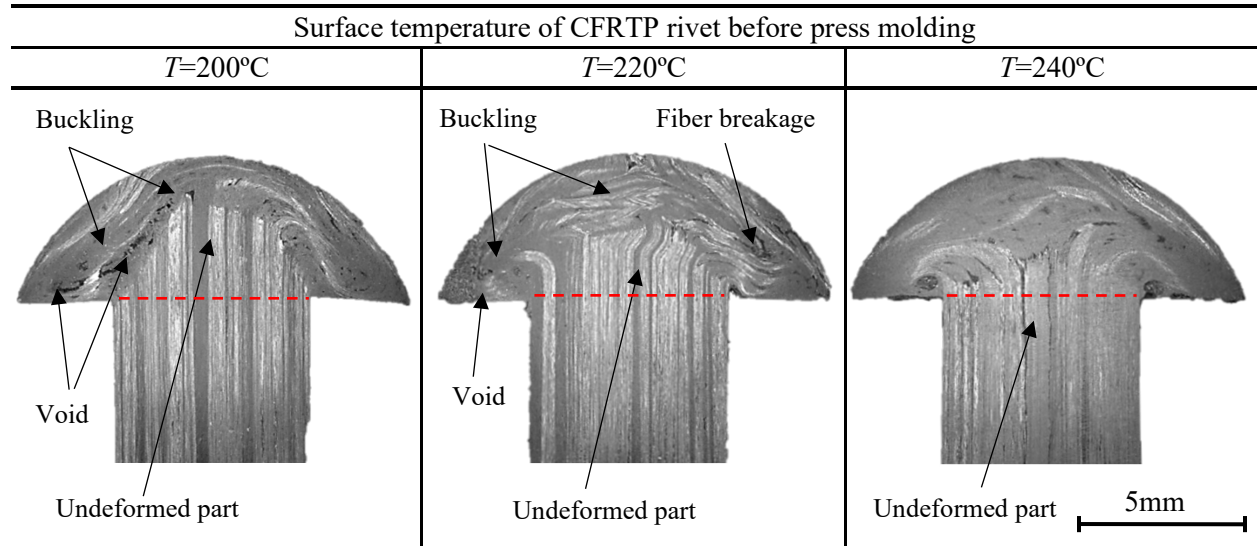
Cross-sectional images of UD-CF/PA6 rivets molded at various surface temperature of CFRTP rivet before press molding.
